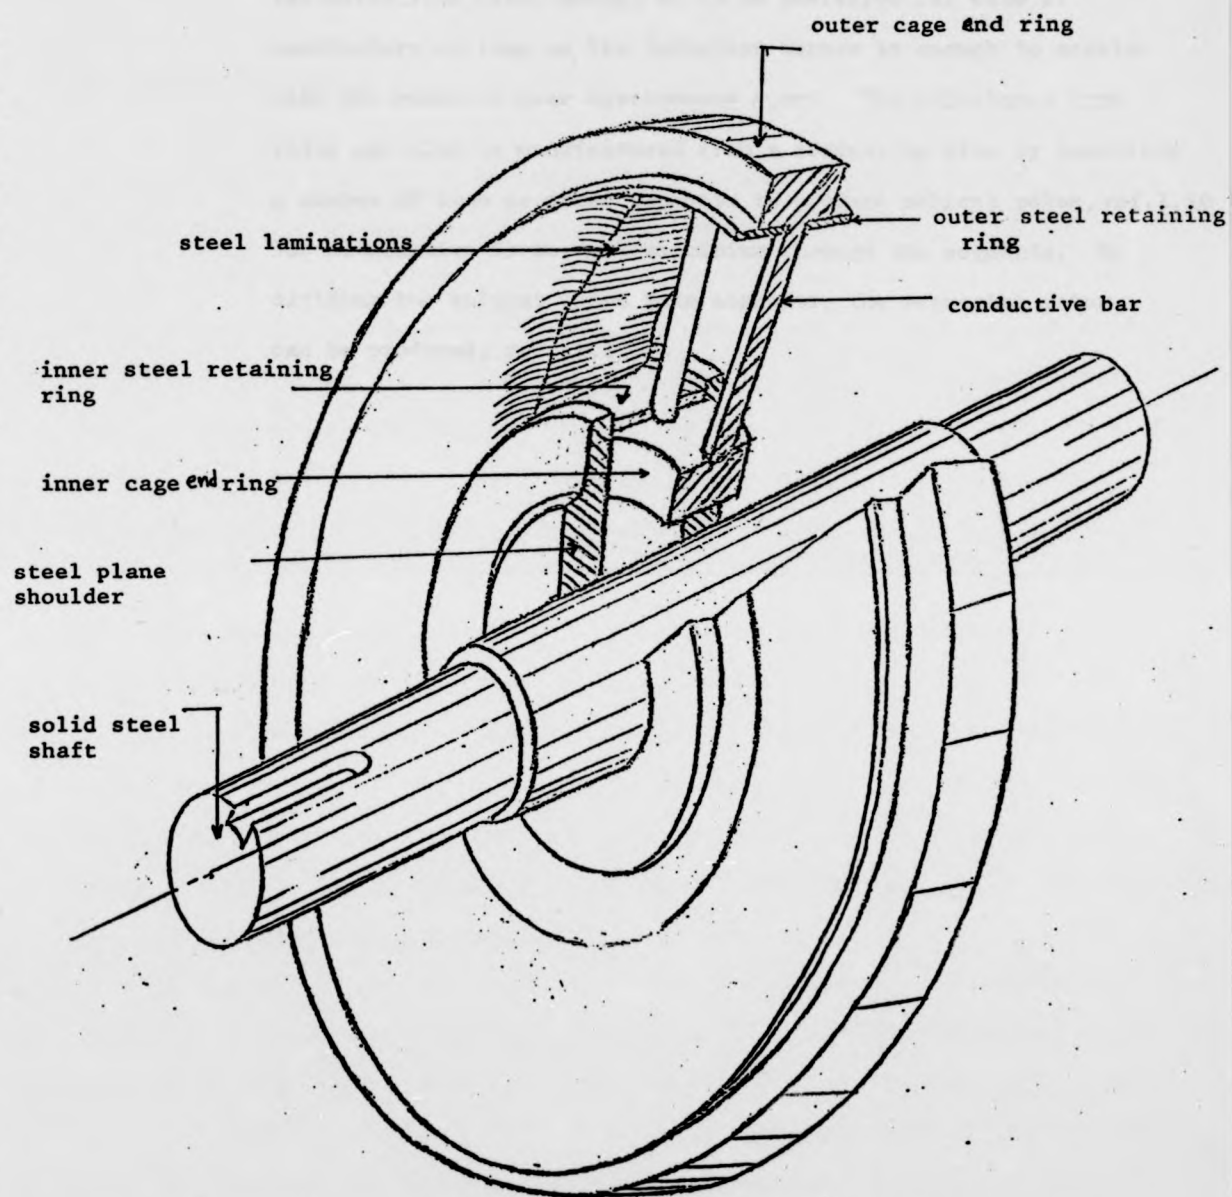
The first envisaged construction of a complete steel core single cage rotor for the experimental motor.
